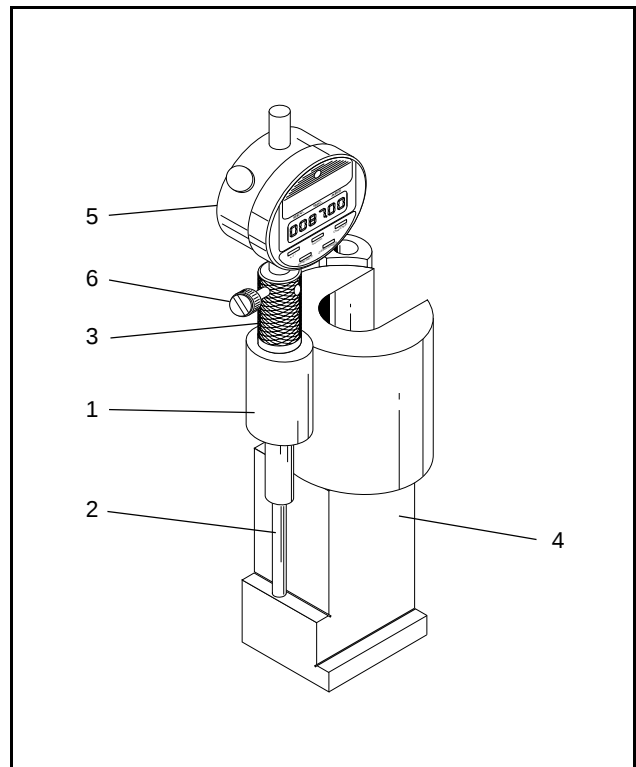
Adjustment Of Fuel Timing Tools (64.34 mm fuel setting), Preferred Method
